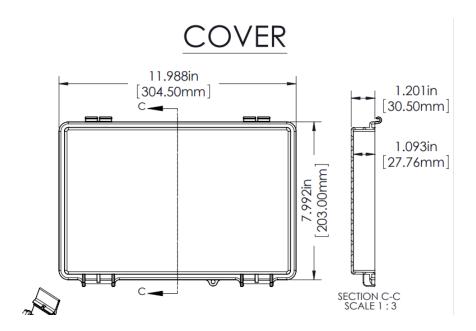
Electrical Enclosure Standard Showcasing the Cover and its Dimensions
